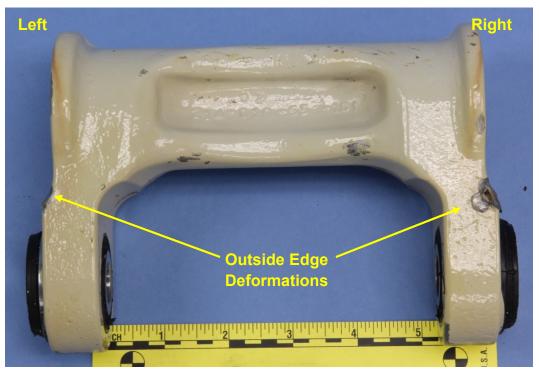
The idler link assembly, after removal from the collective assembly and cleaning, aft-looking forward. Two witness marks were noted where the link can contact the collective arms.
